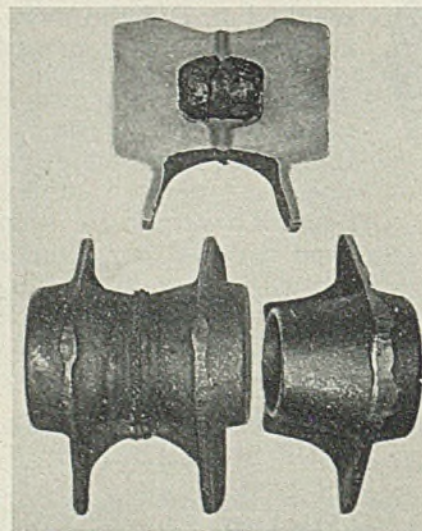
Butt-flash welded engine mounting brackets, before and after welding and a cross section of welded pair. These were welded by machine shown in Fig 7
